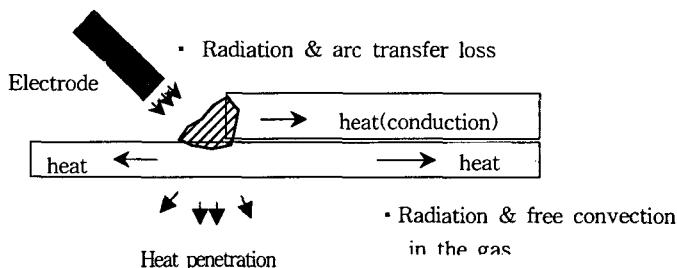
Fillet weld model configuration of the sleeve-to-pipe fillet weld. (Model 2)
